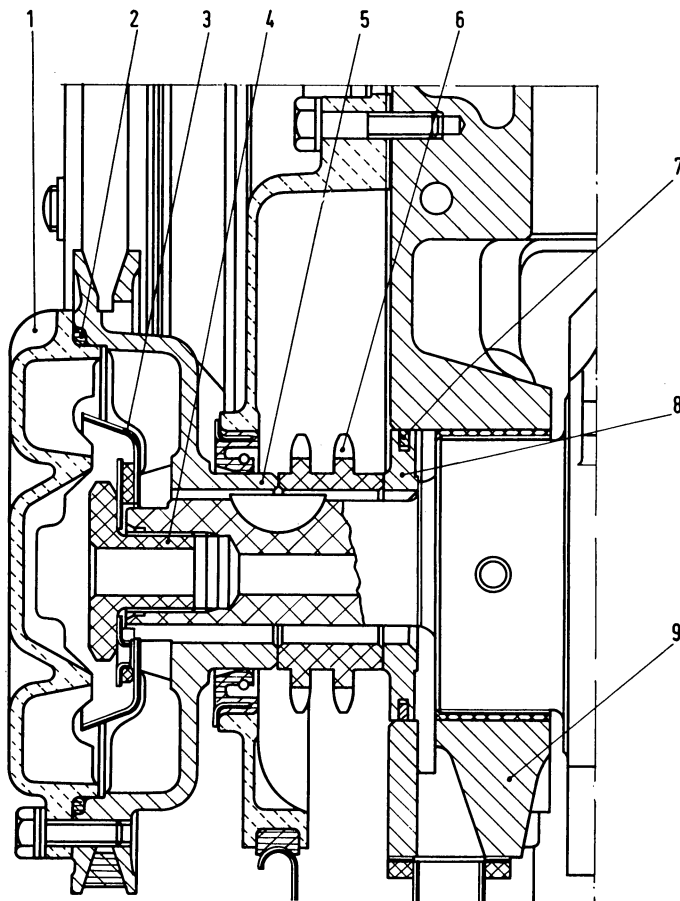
Detail of 115 C.005 engine side section view across centrifugal oil filter.
